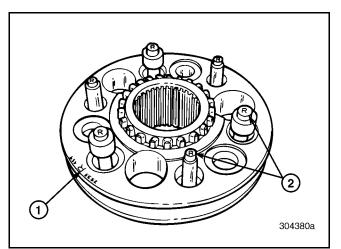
Letter "R" on Sliding Clutch and Synchronizer Pins
